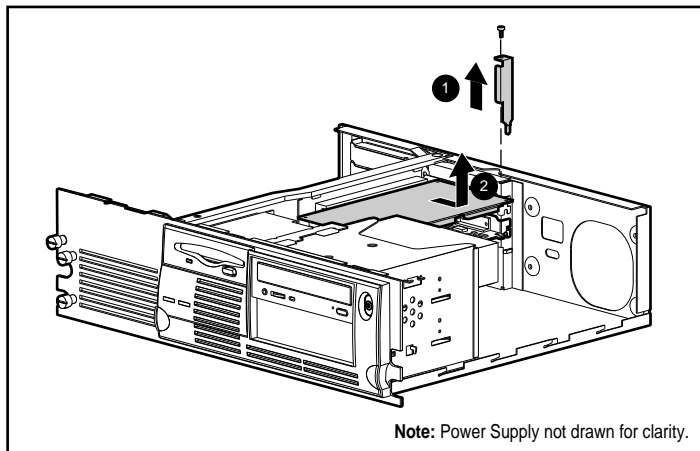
Removing the retaining screw and bracket, Feature Board
